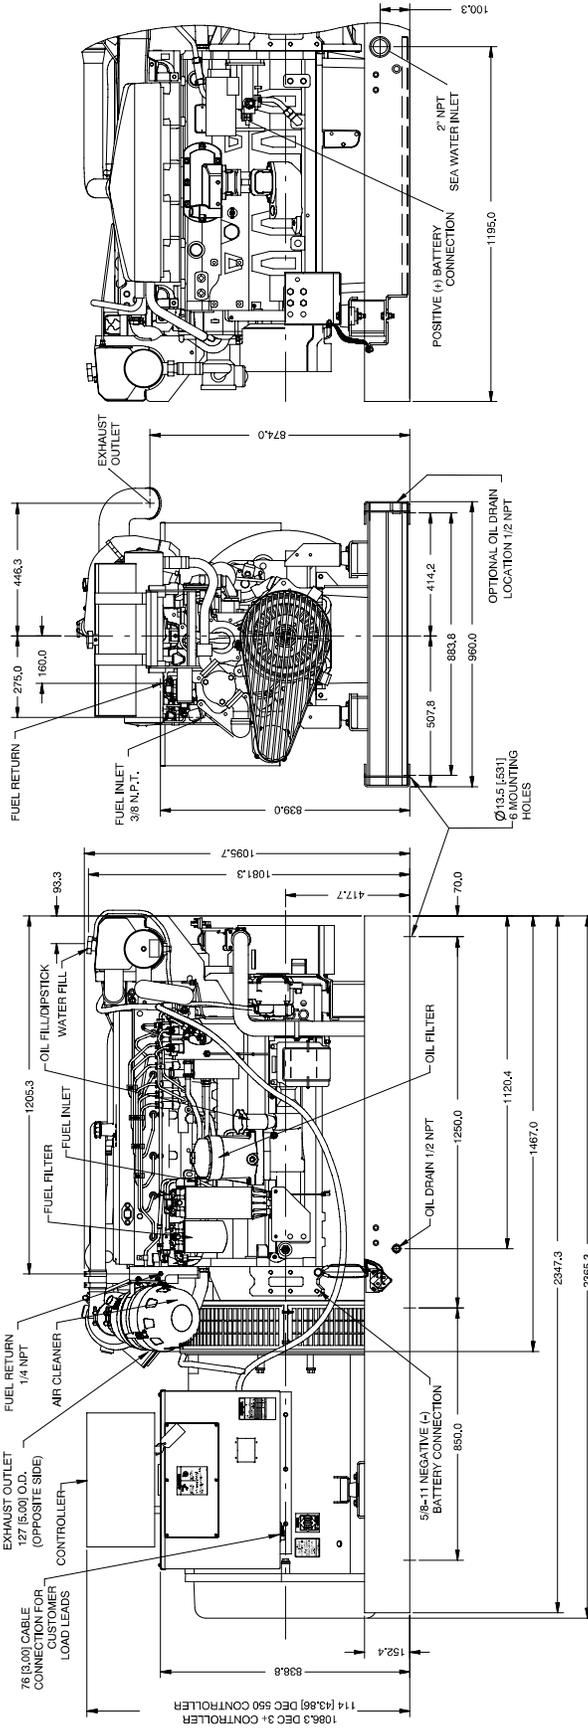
Dimension Drawing, 125/150EOZD and 100/125EFOZD with Dry Exhaust Elbow
